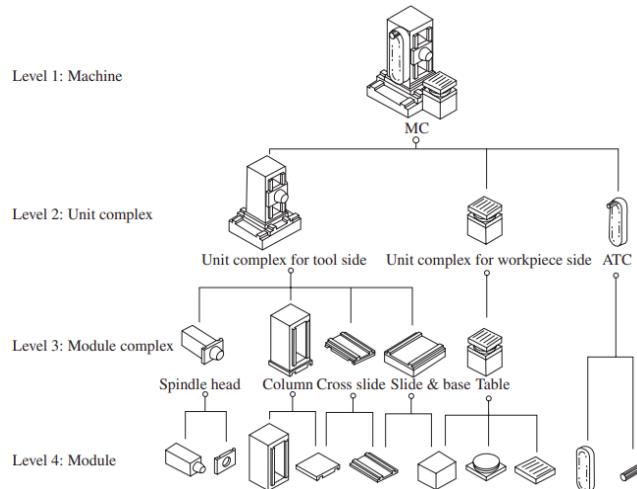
Modular design of the machining center (MC- machining center, courtesy of Ikegai Iron Works)
